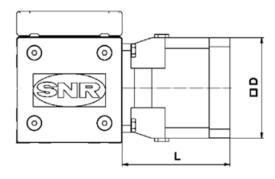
Dimensions AXC with integated planetary gearbox version ZP and ZE
